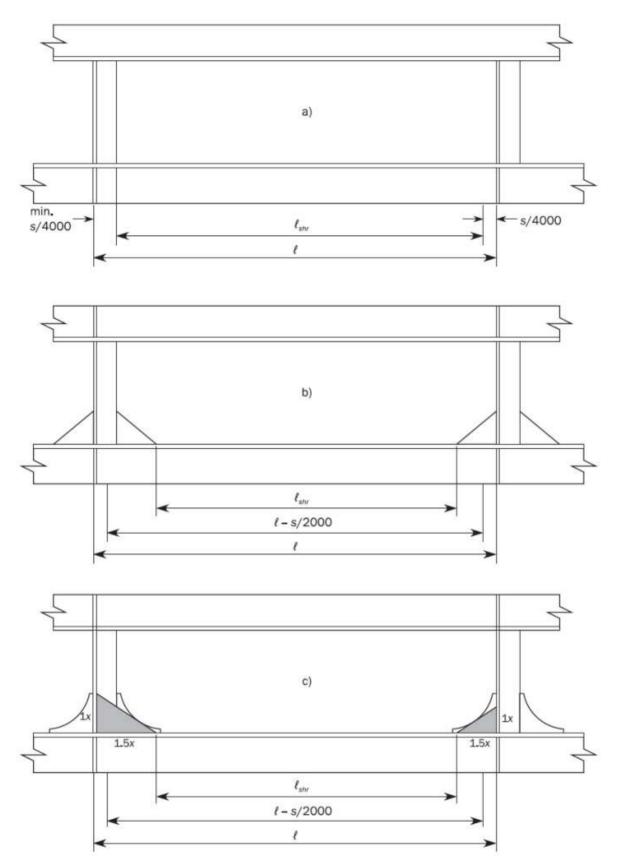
Effective shear span of stiffeners supported by web stiffeners (double skin construction)
